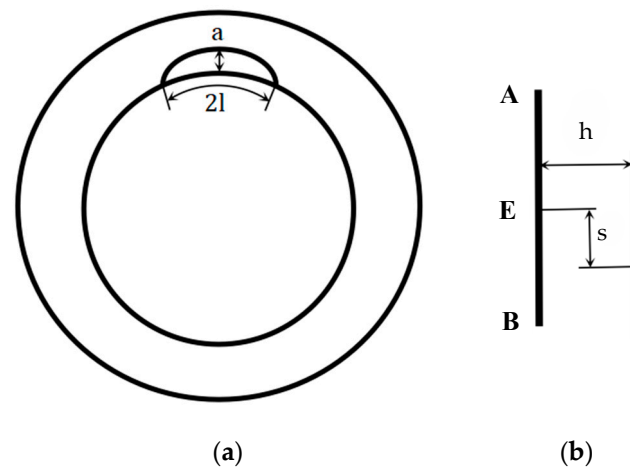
Schematic diagrams of cracks: (a) crack on the annular inner surface of the pipe; (b) double cracks.
